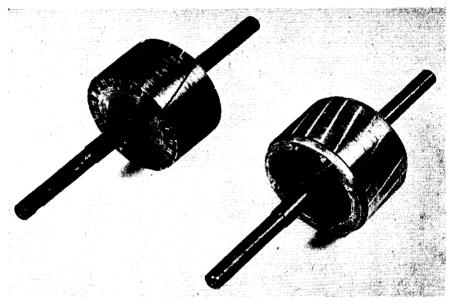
Rotor for small electrical motor. Aluminum is die-cast around the lamination and shaft assembly, left, to form a complete rotor, right.
